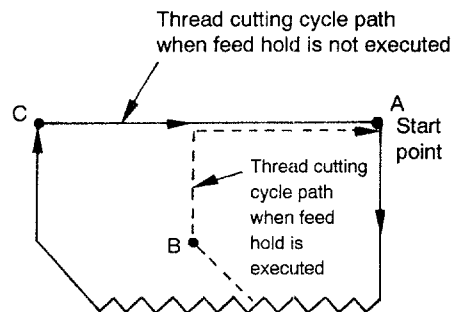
Feed Hold during Thread Cutting Cycle
